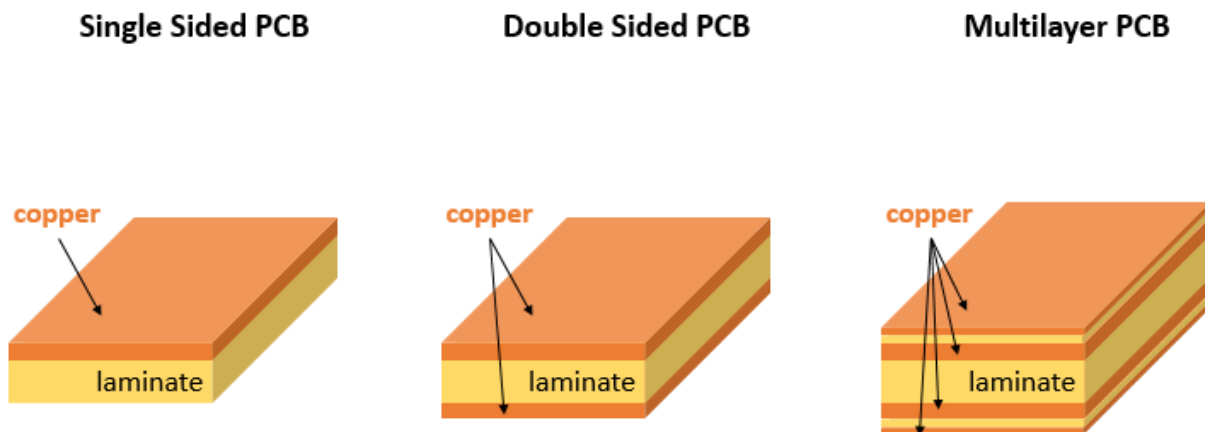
Construction of single-sided, double-sided and multilayer PCBs
